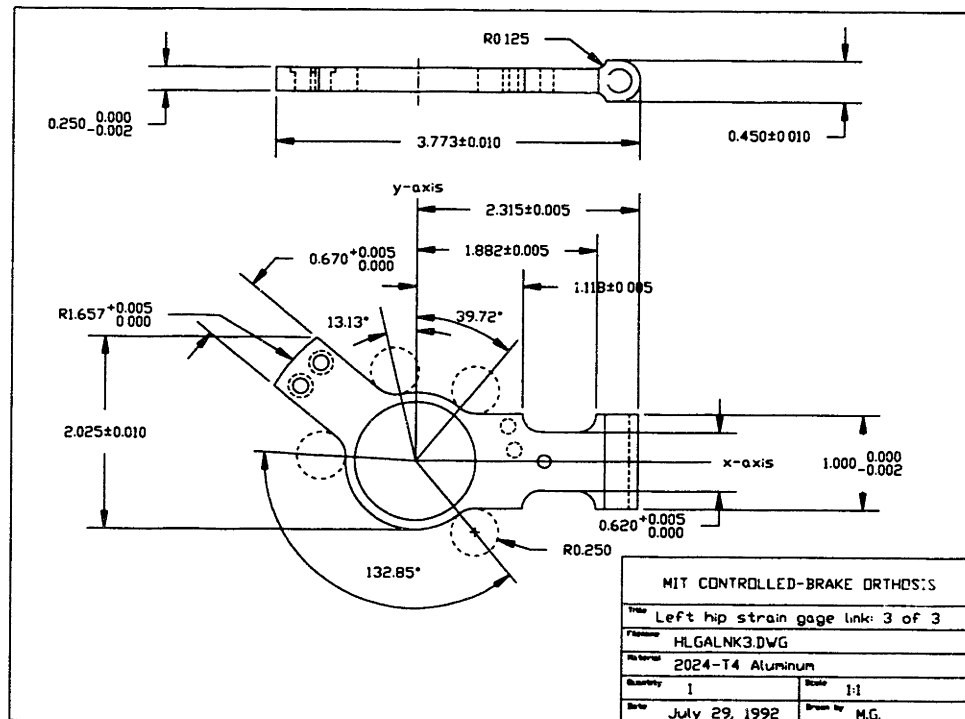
Link that couples left hip gear to the brace (drawing 3 of 3).
